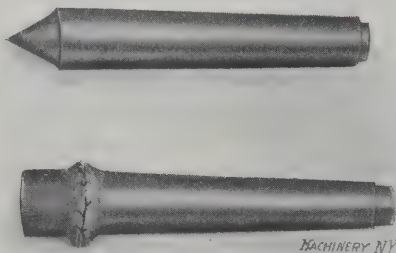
Lathe Center made with High-speed Steel Point electrically welded
